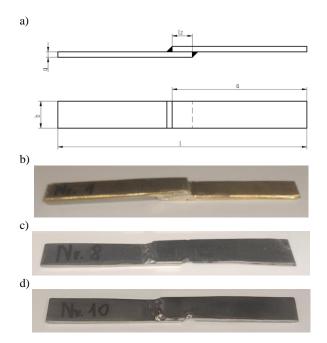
Welded joints: a) diagram of the lap welded joint with double weld used in the tests, b) made of copper alloy, c) made of unalloyed structural steel, d) made of acid-resistant steel
